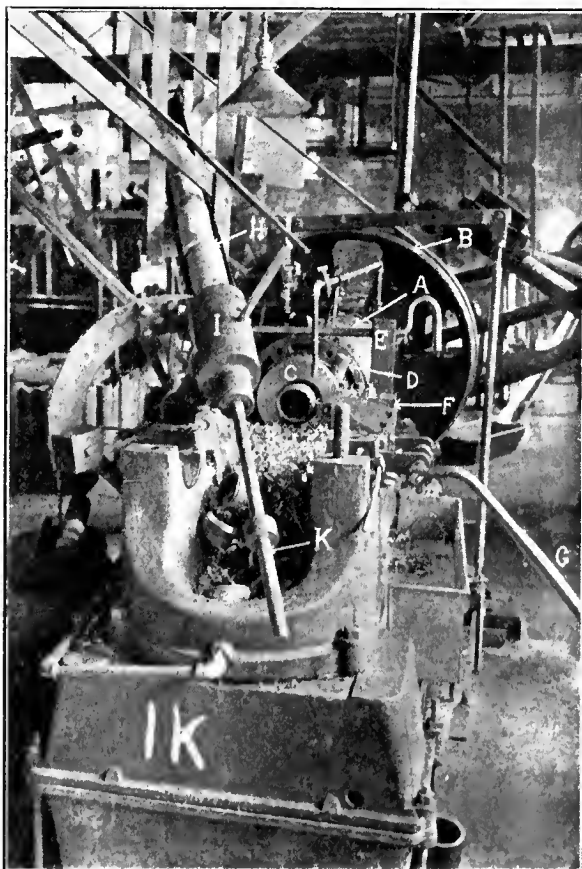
TRANSFORMED GAS ENGINE DOING DUTY AS CUTTING-OFF MACHINE
